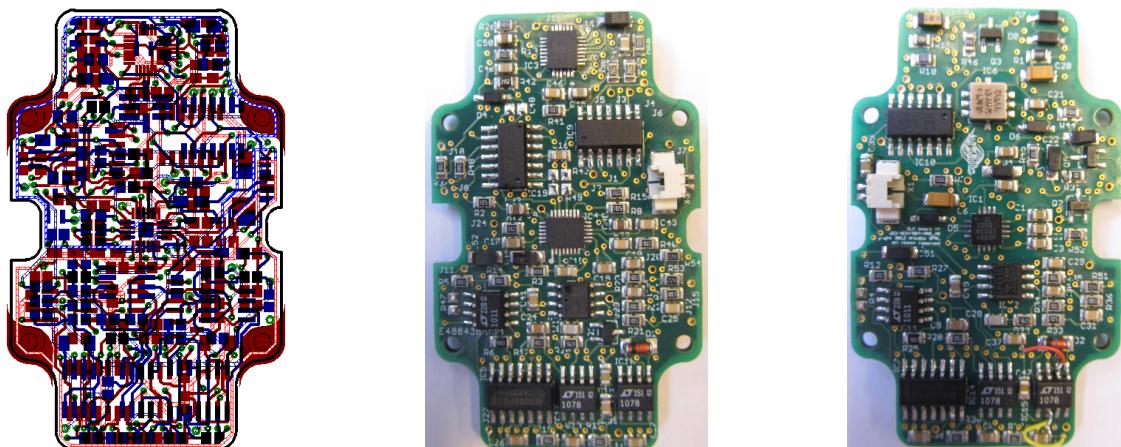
Board layout (left panel), top view (middle panel) and bottom view (right panel) of the PCB fitted inside the GLM.
